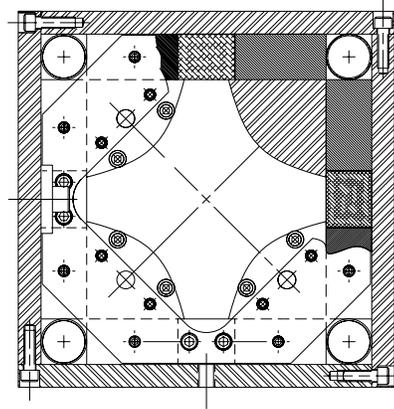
Cross section view of 42 mm aperture radius quadrupoles. One layer of 25.4 mm thick  $\times$  49.5 mm wide bricks drive each back side of each pole. A stainless steel tube in each corner holds iron washer packages captured on stainless steel rods which are used to tune magnet strength and field shape.
